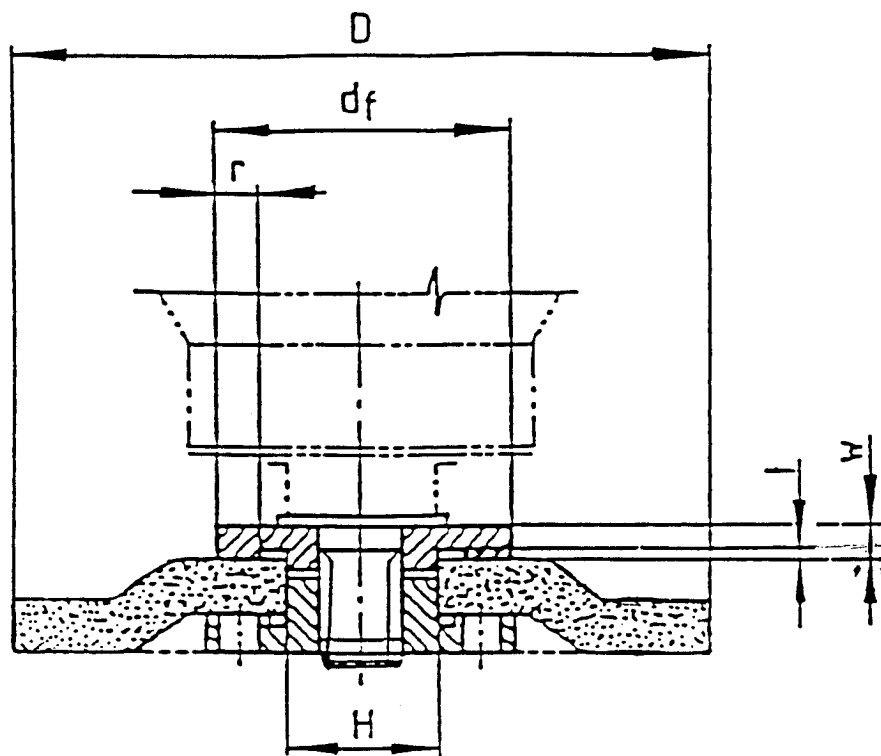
a - Example of flange assembly for reinforced depressed centre wheel of type 27 and 28,
